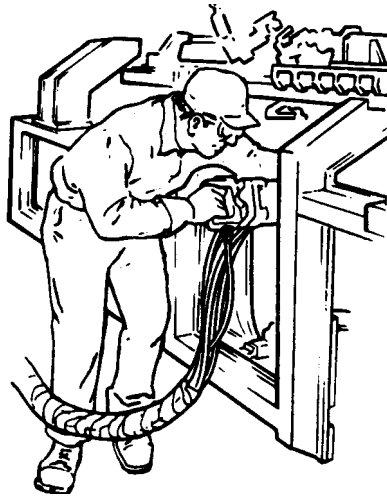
PORTABLE RESISTANCE-SPOT WELDING GUN APPLICATION
